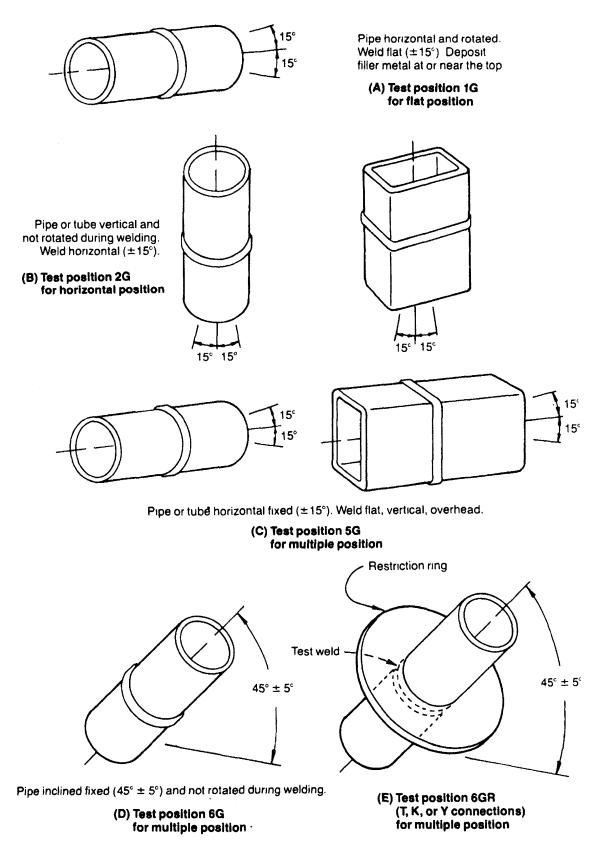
Positions of test pipes for groove welds
